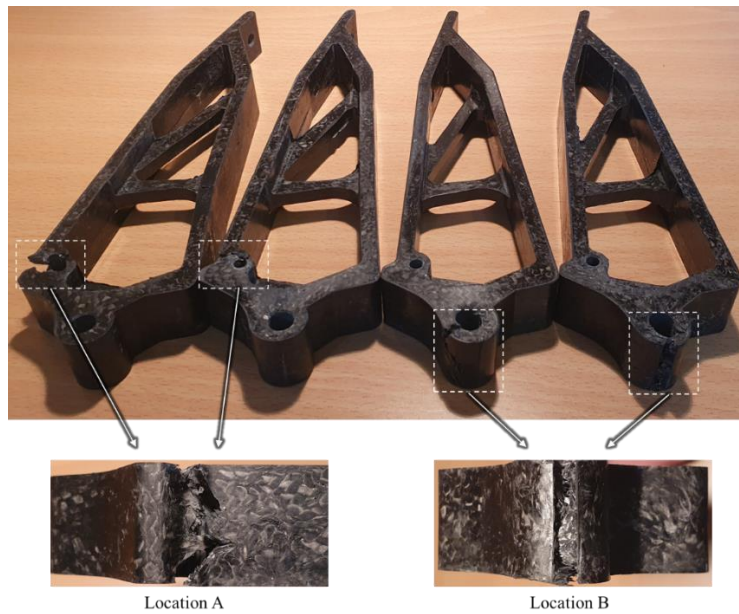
Fracture locations with a detail of the fracture surfaces of the tested pedals.
